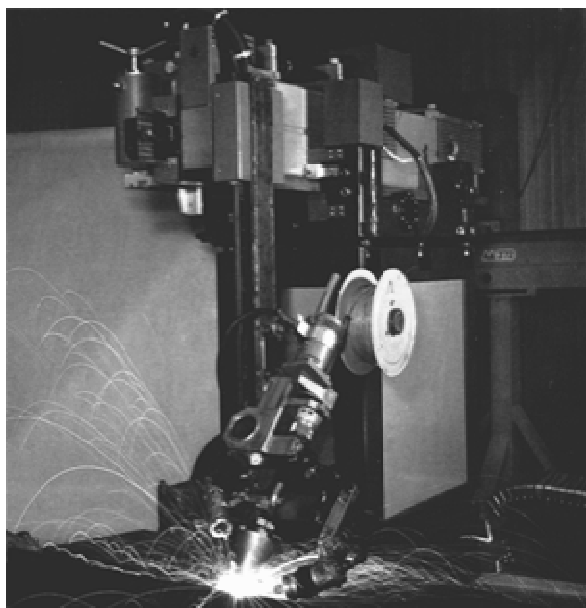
Automatic welding and surfacing machine of AD400 series, structured by modular-assembly design principle, with utilization of mechatronics principles
